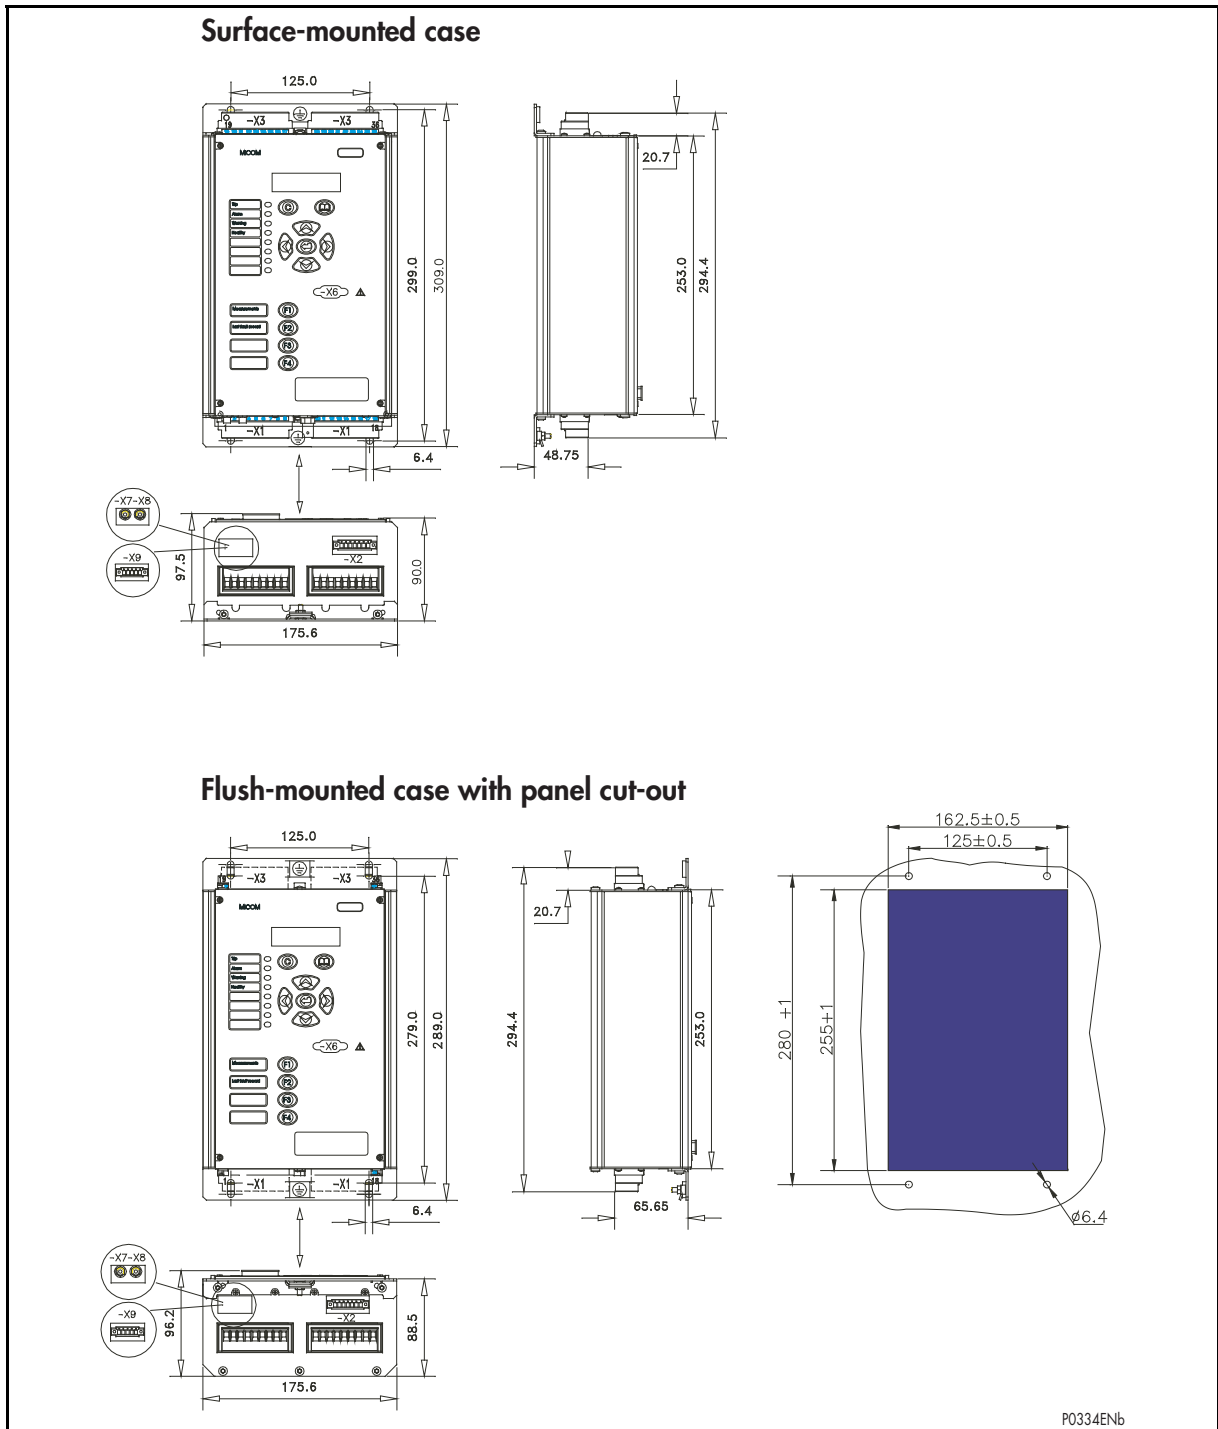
DIMENSIONS WITH SURFACE MOUNTED AND FLUSH MOUNTED CASES
